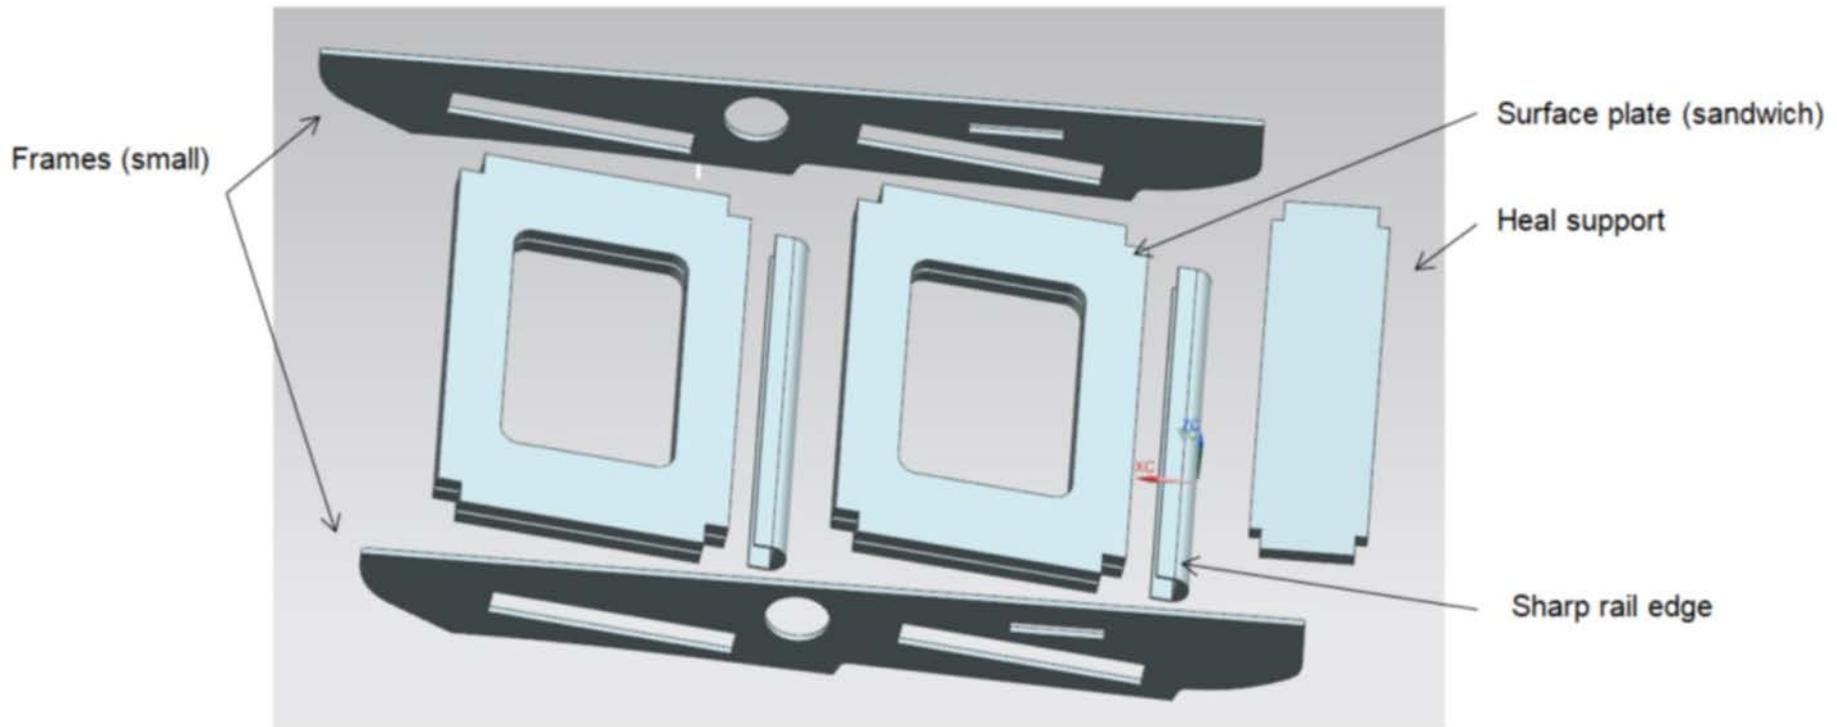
Exploded view of the snowshoe in CAD (only provided parts are visible).
